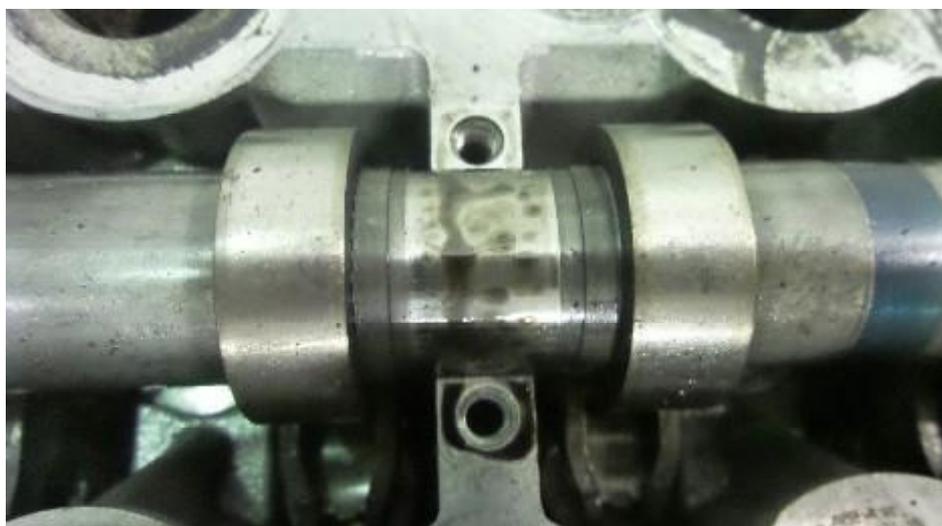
The cylinder head (one of two) of the motor vehicle investigated LAND ROVER at removing covers a cylinder head (Fig. №7) installed camshafts are properly installed and are in perfect condition, excessive friction traces in the form of scuffing and signs of overheating in the form annealing do not have. Valve mechanism without a trace faults. Condition Cylinder head gasket without gusts and traces of leaks.
